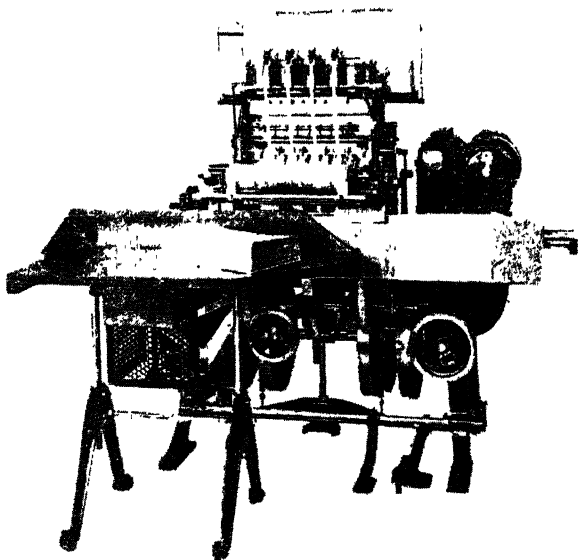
NO. 12 "SMYTH" BOOK-SEWING MACHINE.
